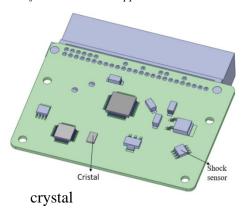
PCB 3D model (bottom) – location of electronic components on the board
